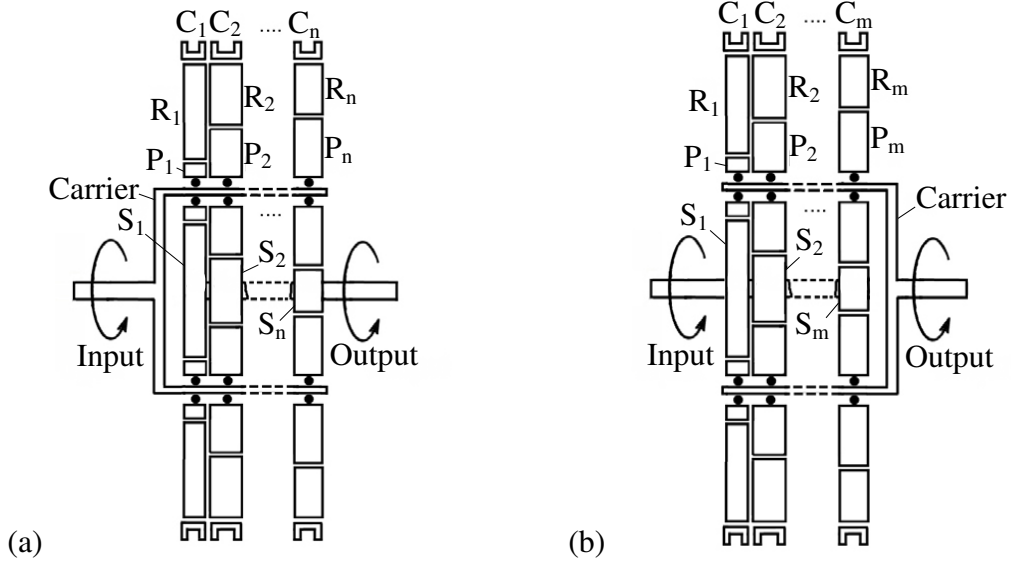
Multi-stage planetary gear sets: (a) overdrive gear train; and (b) underdrive gear train
